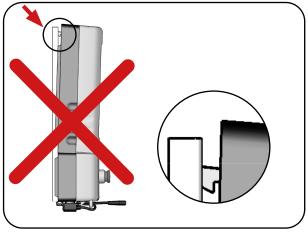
Battery pack mounted incorrectly on the mounting rail
